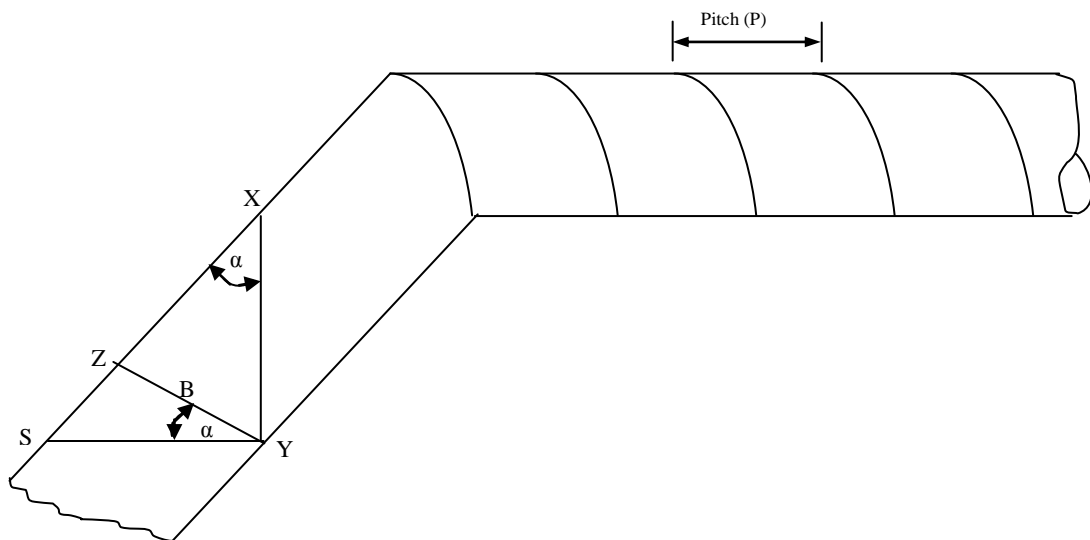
Geometrical detail to specify a spiral welded pipe
